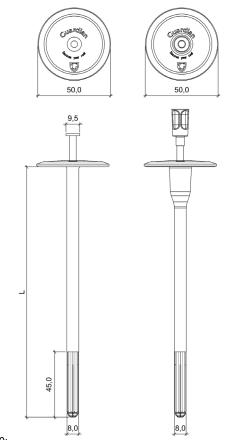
CPN-8 Concrete Plug std. version CP-8 Cold bridge stop version
